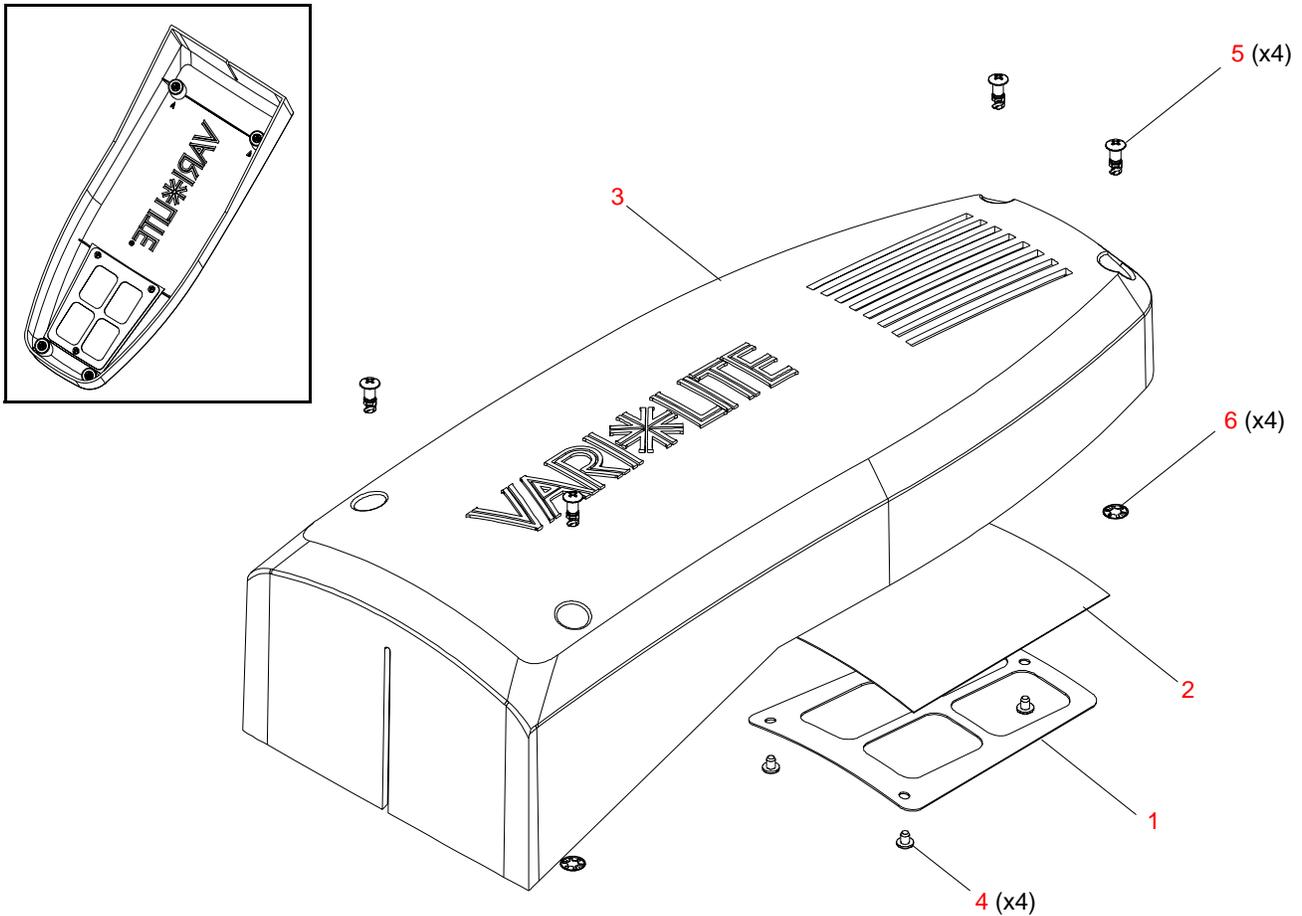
Yoke Arm Cover Assembly (Tilt Motor Side)
